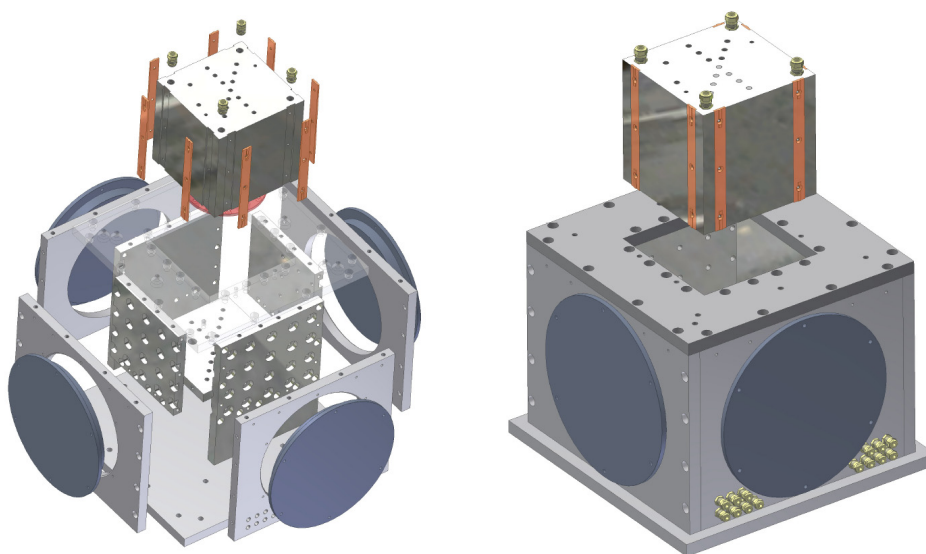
Exploded view (left) and axonometric view (right) of the block/box system (Federspiel, 2011).
